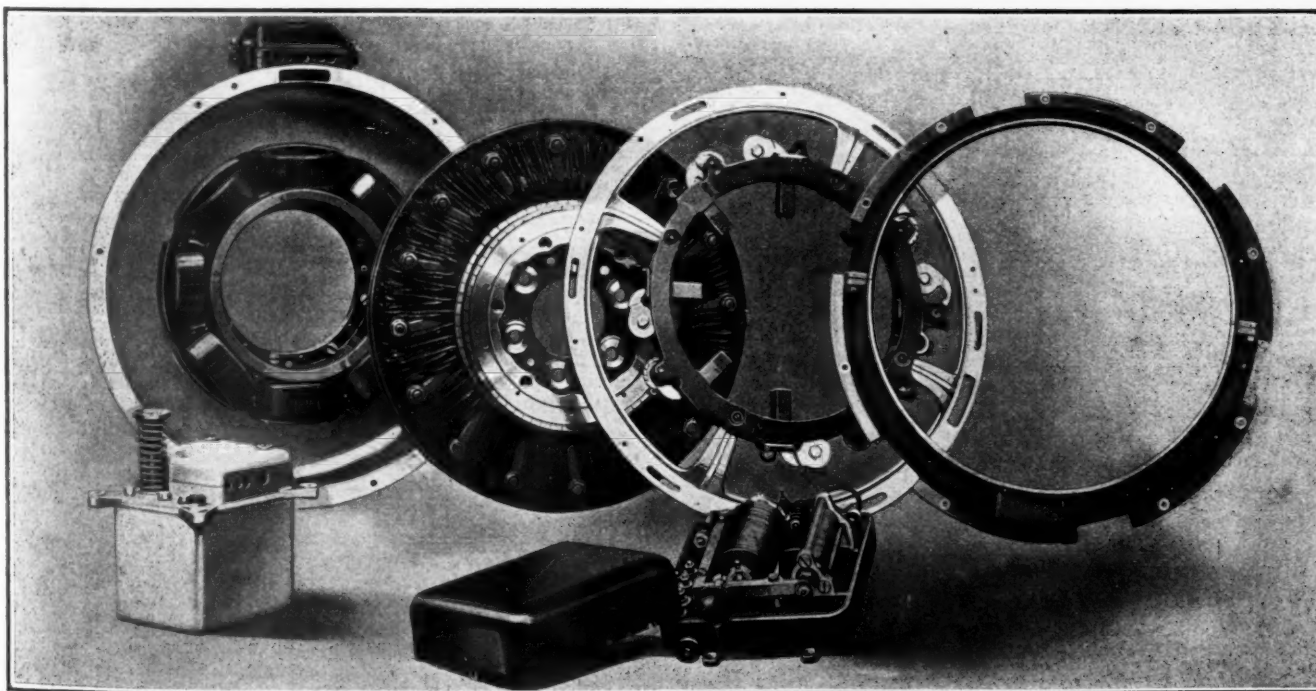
View of the assembly of the motor generator, the switch, starting button and dash regulator
